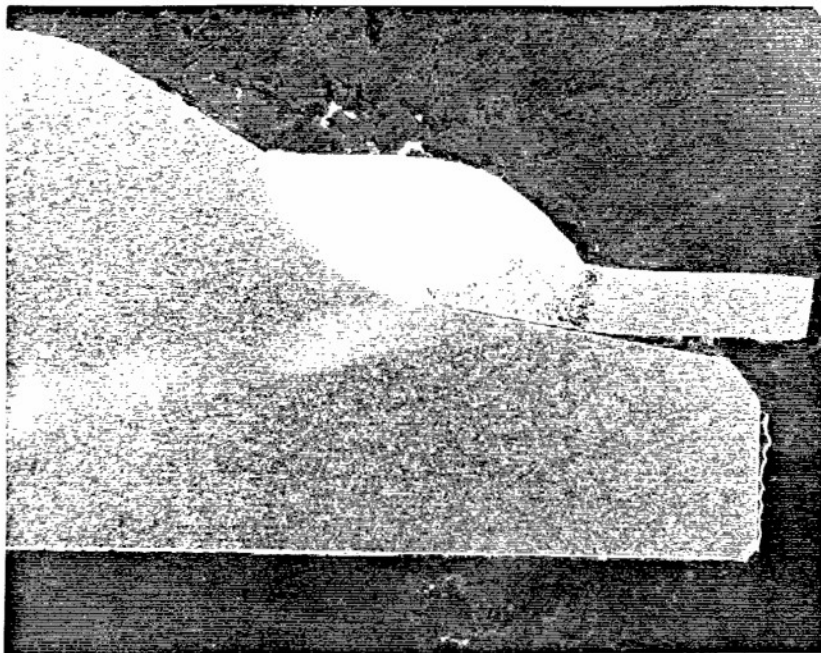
Macrograph of the Butt Weld From Pull Test Specimen No. 5B. (The depth of penetration was acceptable; magnification 7.5x.)
